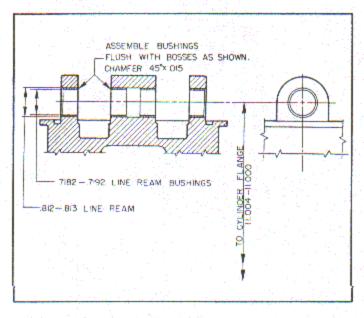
Dimensions of Rocker Shaft Support Bushings
